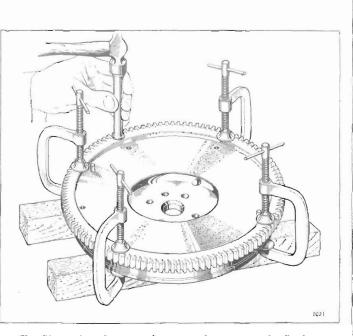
Using clamps to fit a new ring gear to the flywheel
